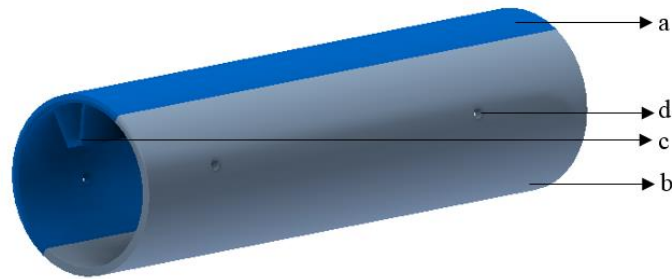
CAD of Cover. (a) Upper part with cable canal, (b) Lower part of the cover, (c) Trapezium shaped canal, (d) ISO M3 screw holes.
